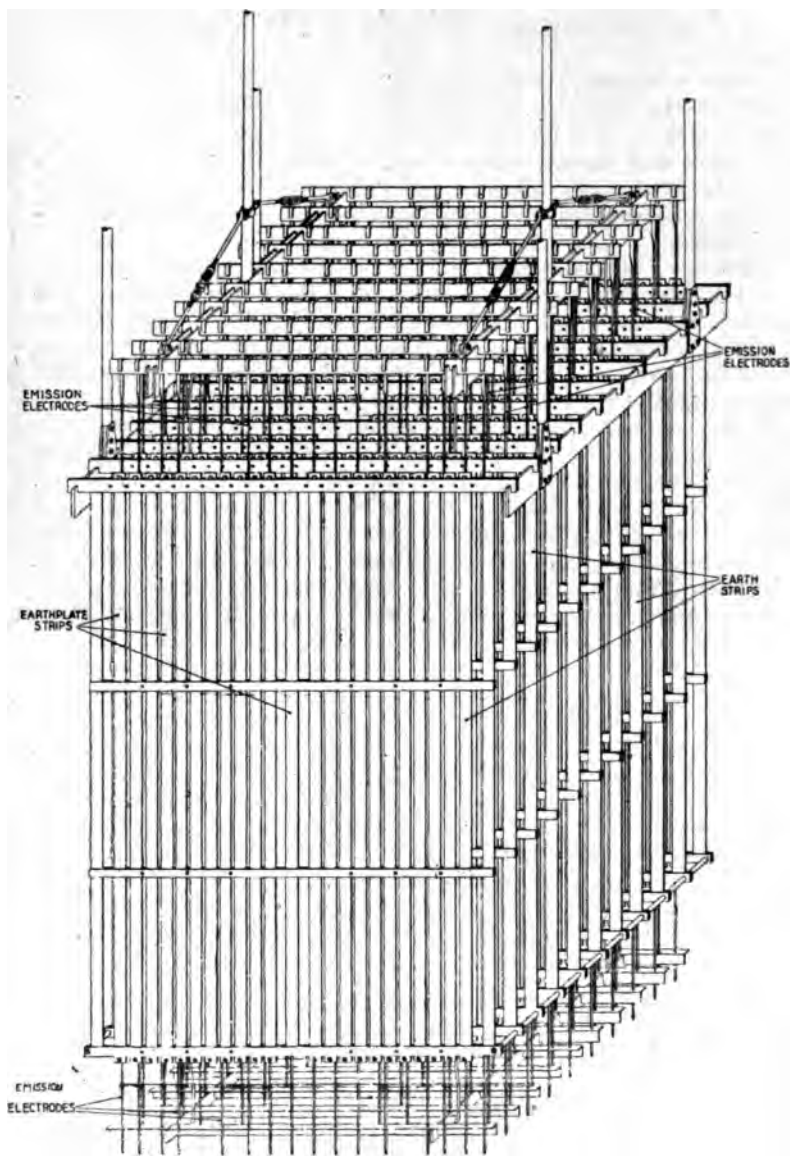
' Hot ' Cottrell—electrode assembly (perspective view).
